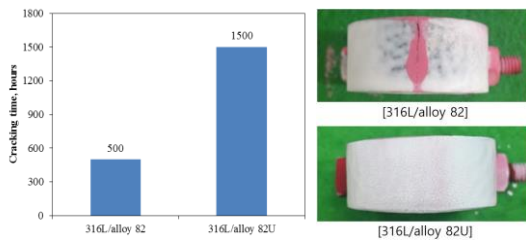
Effect of UNSM on Stress Corrosion Cracks in SUS316 and Alloy 82 Welds
